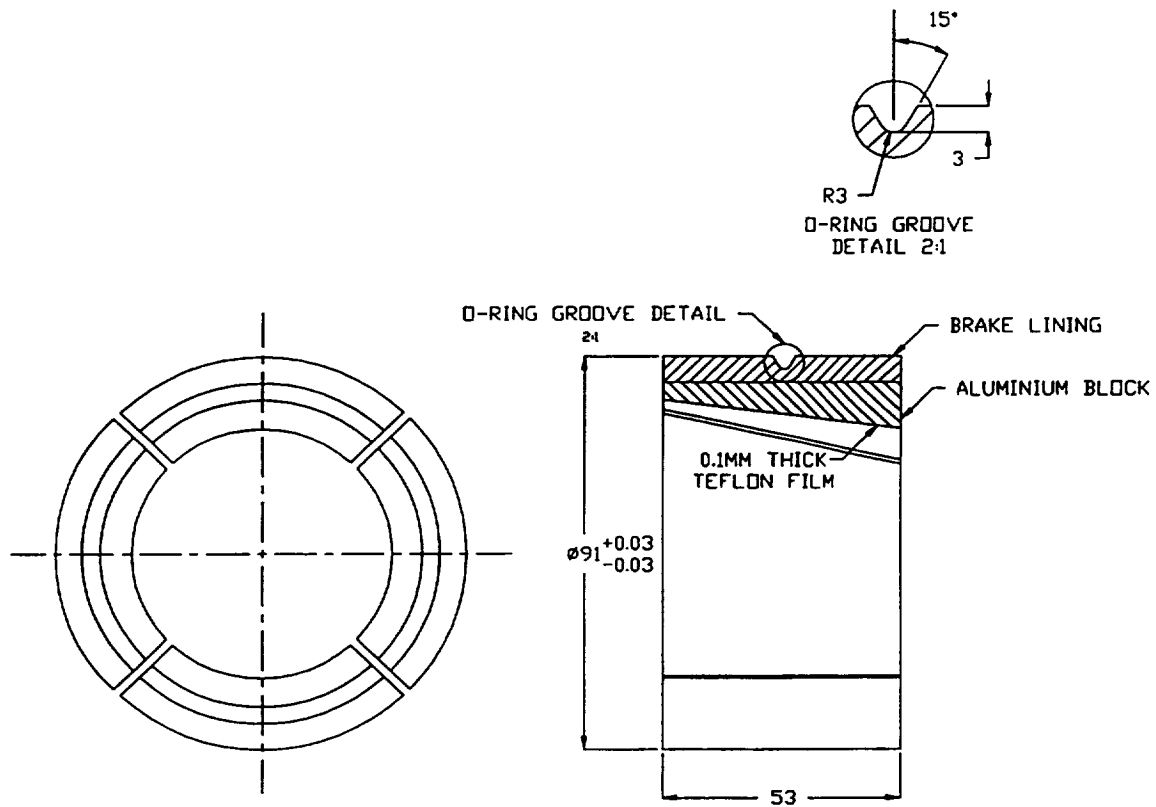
X-2 Inner Piston Brakes, Dimensions in Millimetres
